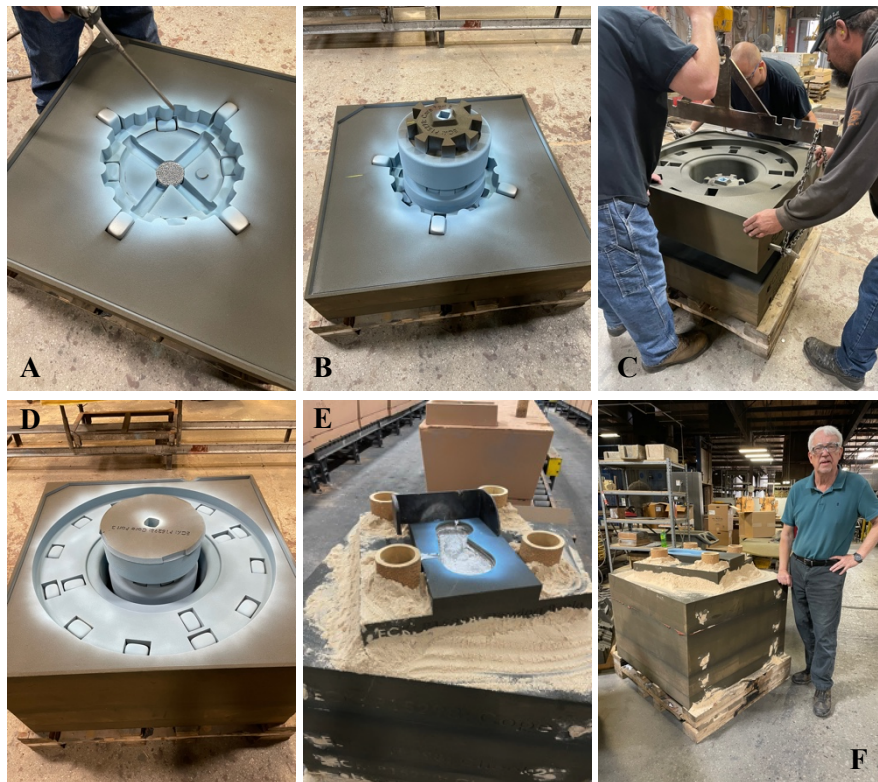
A-D) A series of photographs displaying the 3D printed sand mold assembly process prior to pouring molten aluminum. E,F) Assembled sand mold after pouring molten aluminum.
